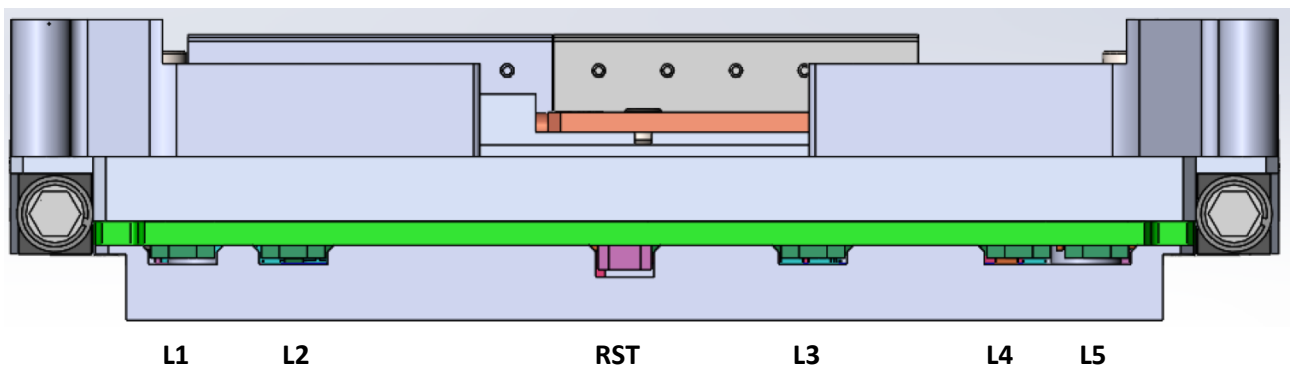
RC3 variant - Front Panel Interfaces - FB-VX3-0010 tooling option equipped
